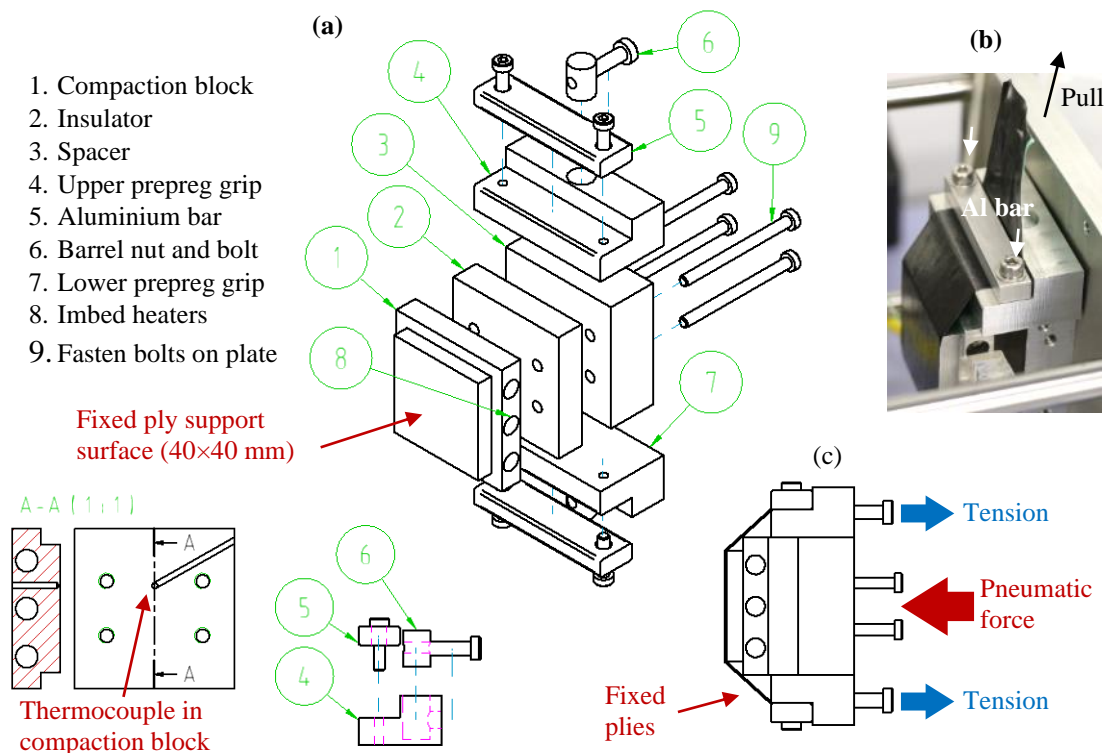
(a) Assembly view of compaction unit. (b, c) Schematic drawing photo of a prepreg installed on the compaction unit.
